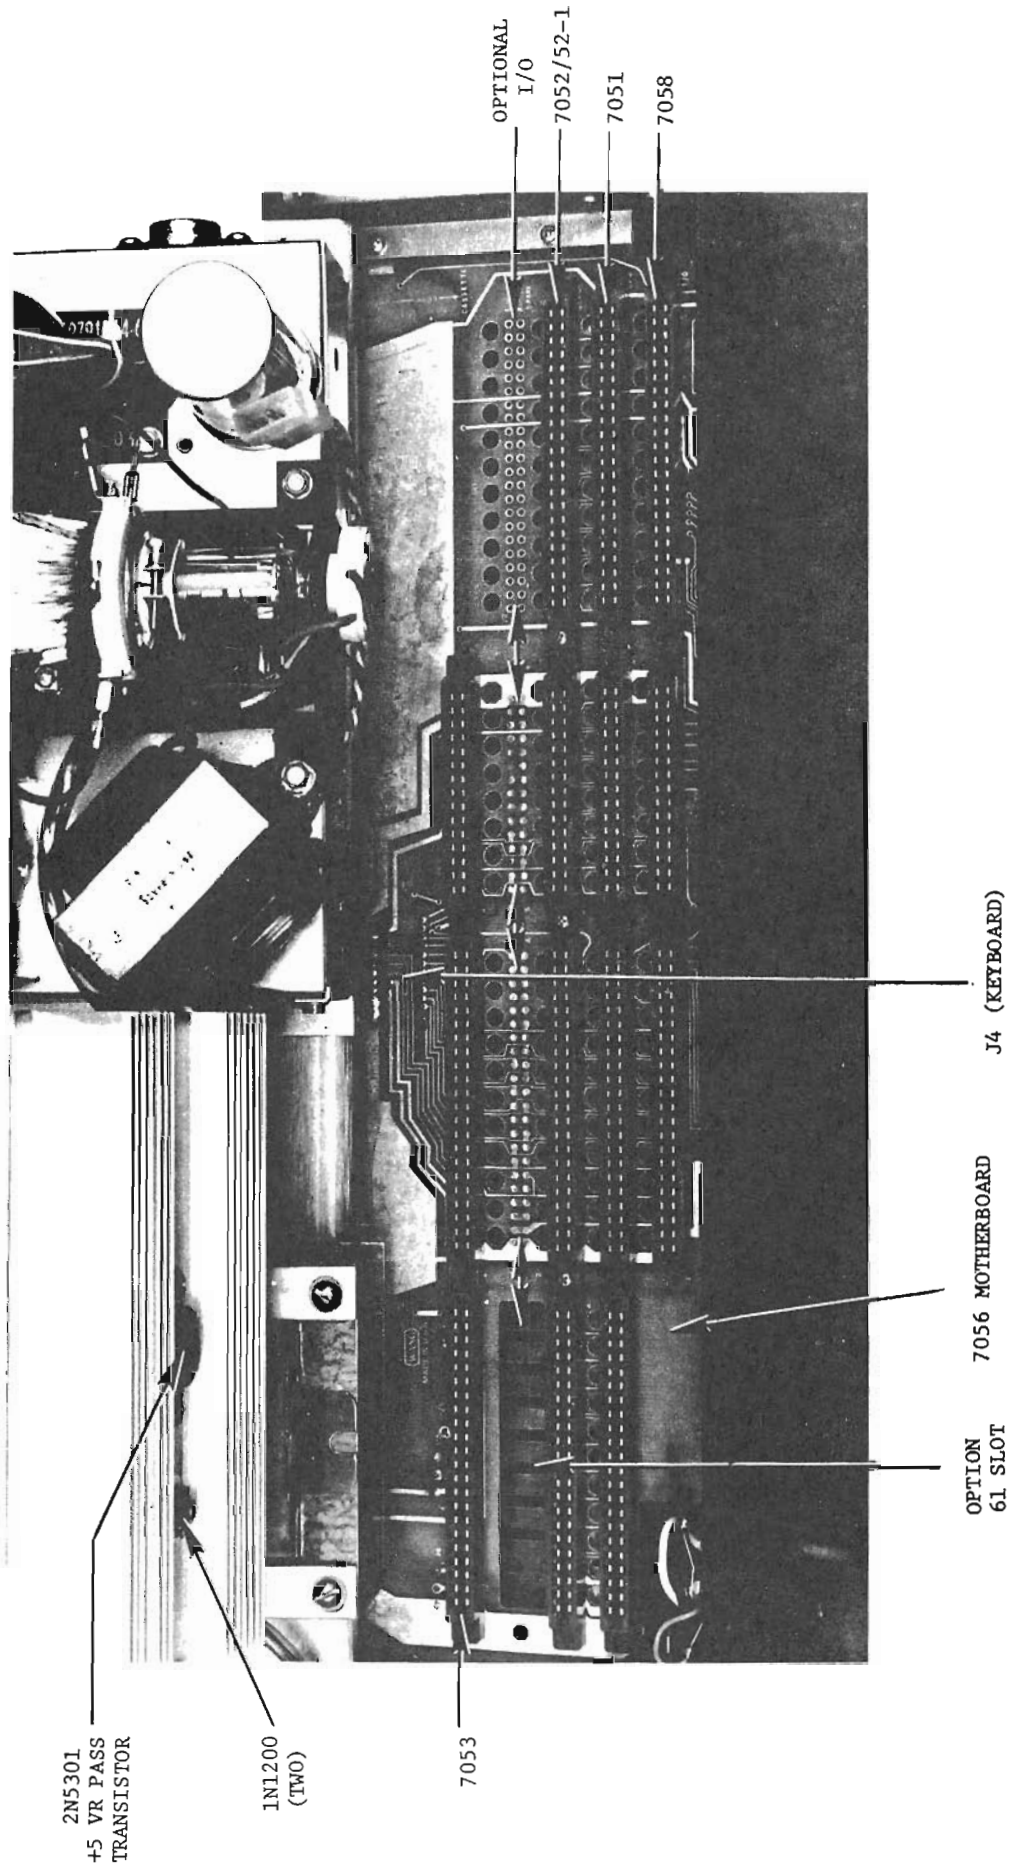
2200E; TOP/REAR VIEW/COVER REMOVED
